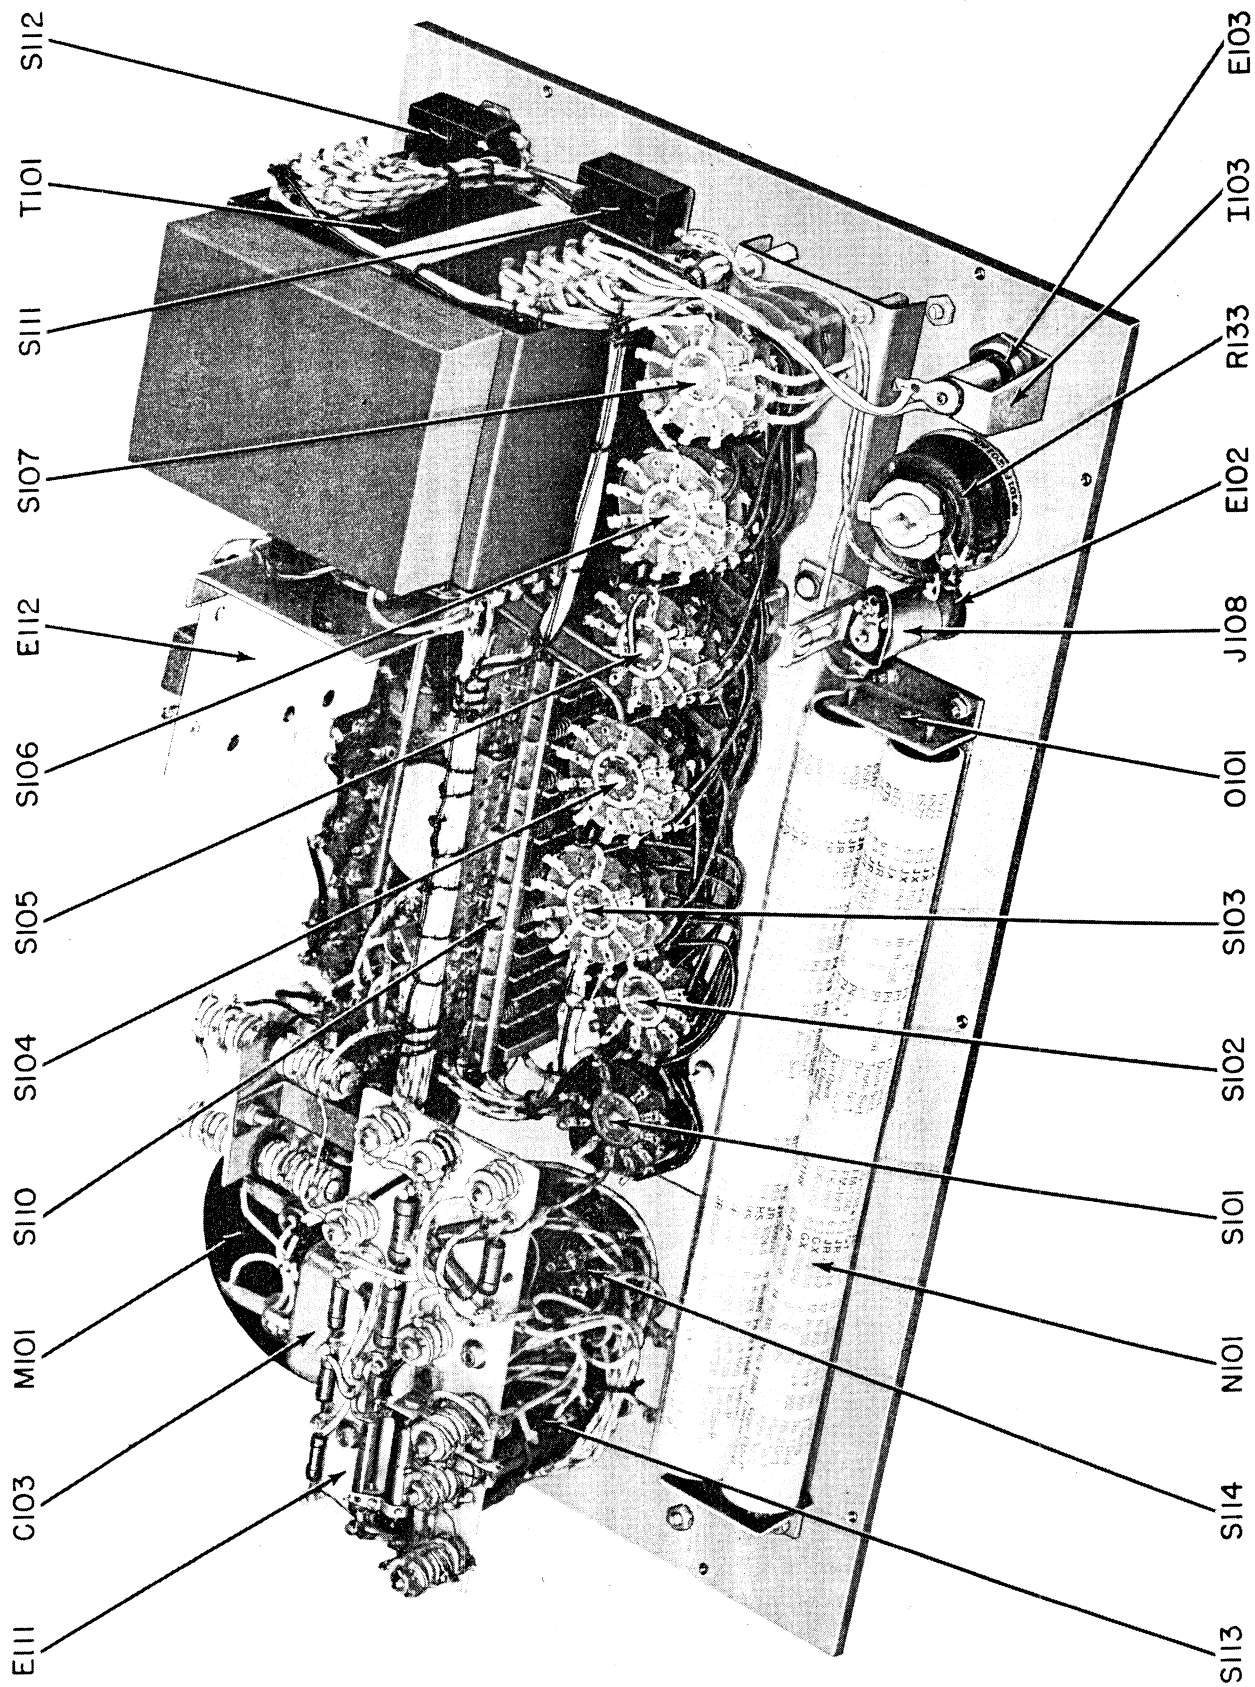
Internal View of Tube Tester TV-3B/U Front Right Oblique
